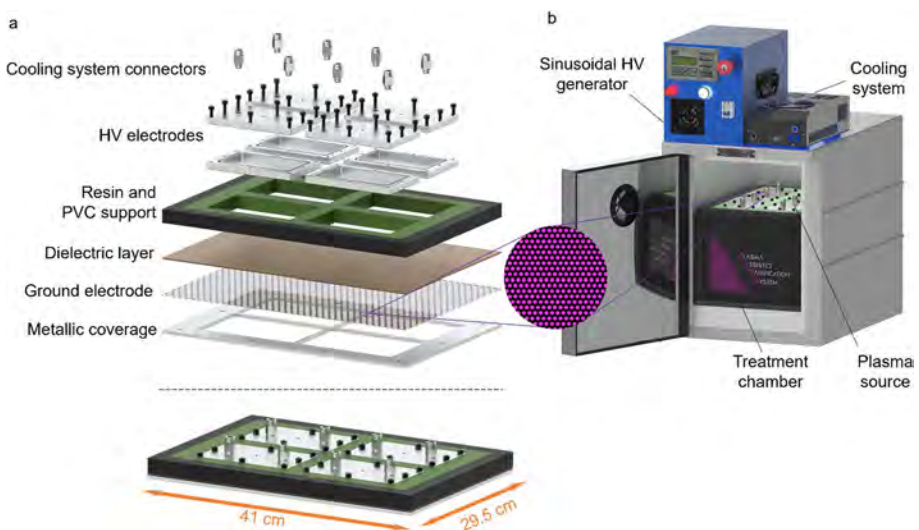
a Plasma source components: exploded and assembly view; b plasma system components
